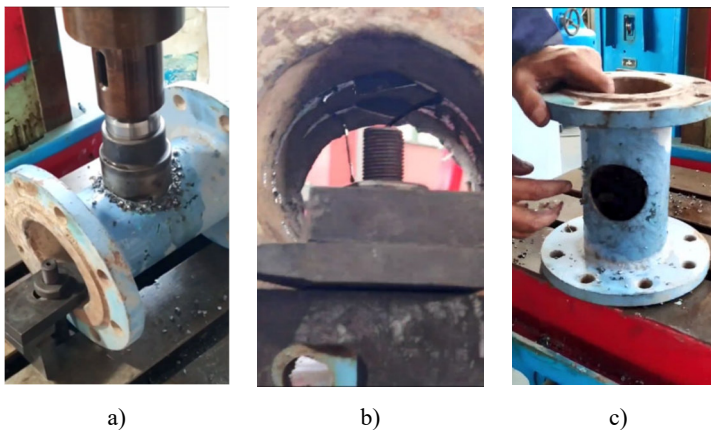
The process of cutting a pipe $\text{Ø}109\text{X}4.5$ using crown cutters: a) external view of the cutting process; b) internal view of the pipe cutting process; c) after finishing cutting the hole.
